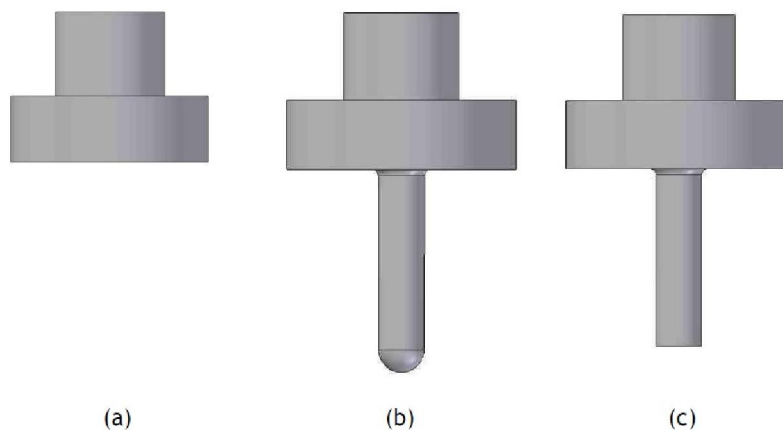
Three types of punch (a) flat punch for compression test (b) round punch, and (c) flat punch for forming test
